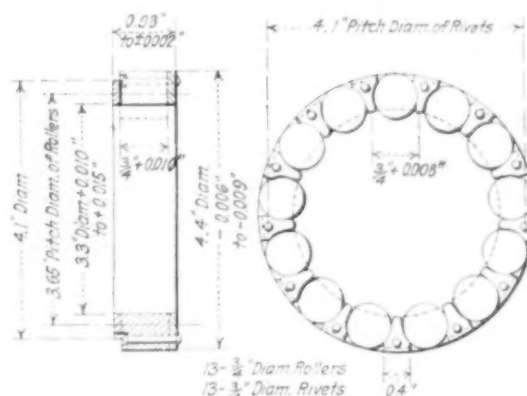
LOCATED CAGE FOR ROLLER BEARINGS
